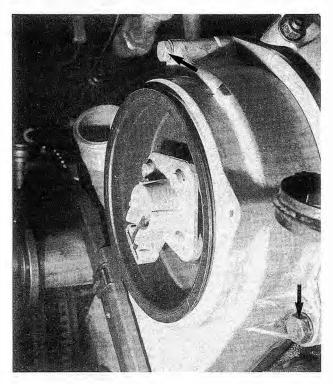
Upper camshaft drive belt cover mounting bolts (arrows).
